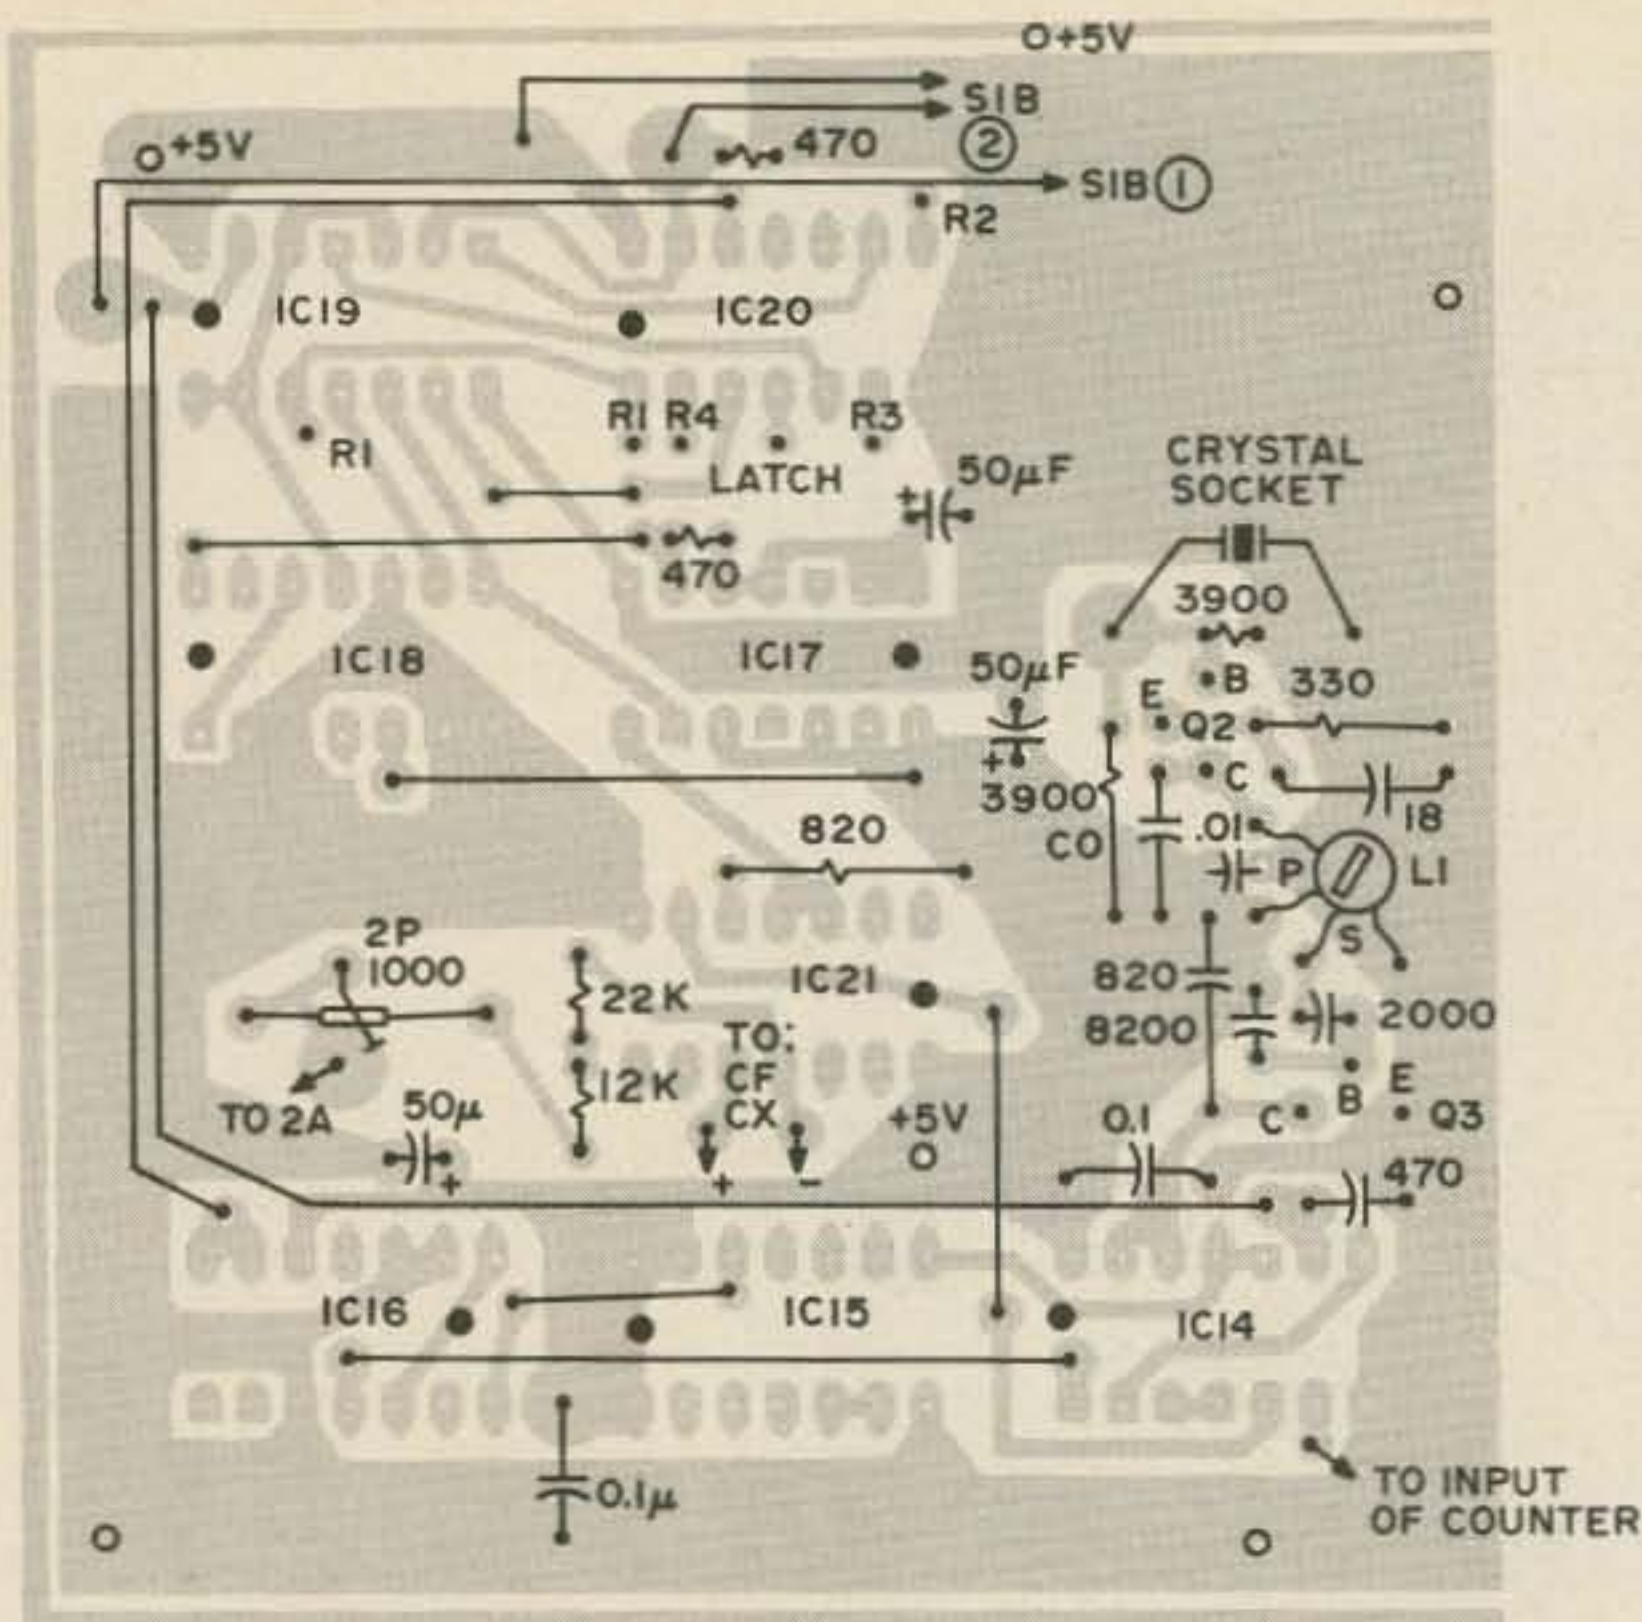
Component layout, oscillator, gate and timing circuits PC board.
